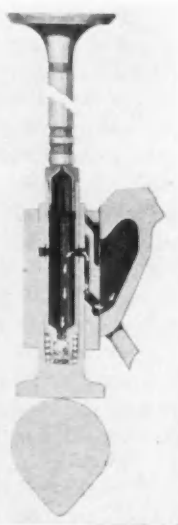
PIERCE-ARROW HYDRAULIC VALVE-LIFTER SHOWING COMPLETE CUT-AWAY ASSEMBLY
